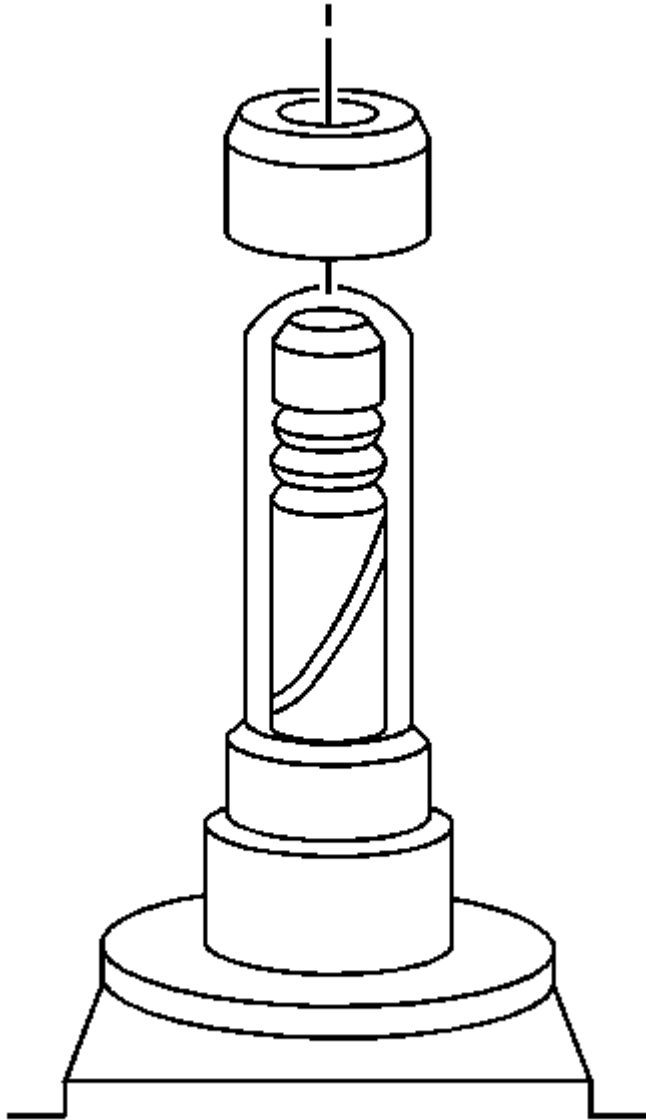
View Of Oiled Valve Stem And Spring Seat
